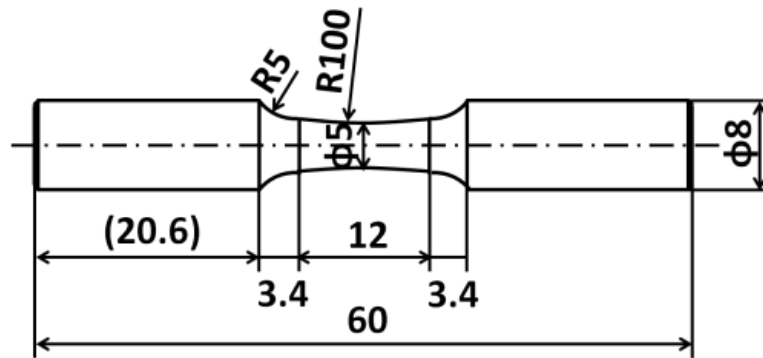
Shapes and dimensions of fatigue test specimens (unit: mm).
